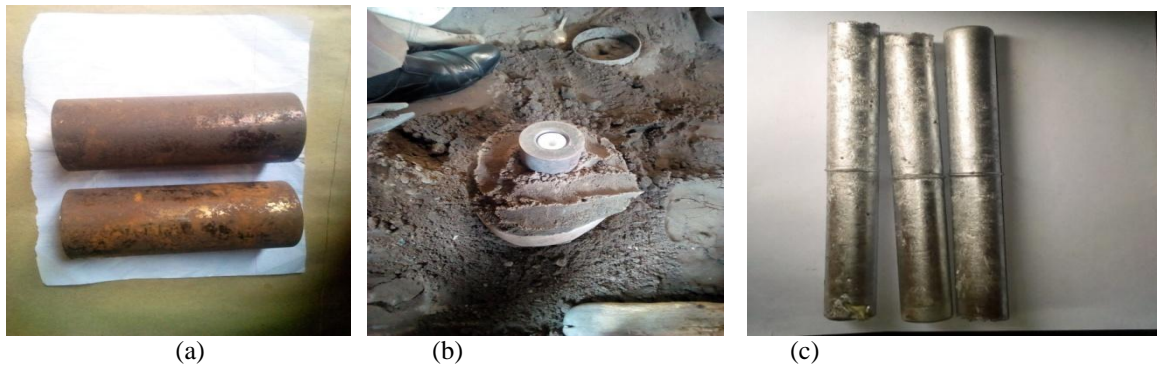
(a) the moulds, (b) molten metal in mould and (c) recycled aluminium ingots
